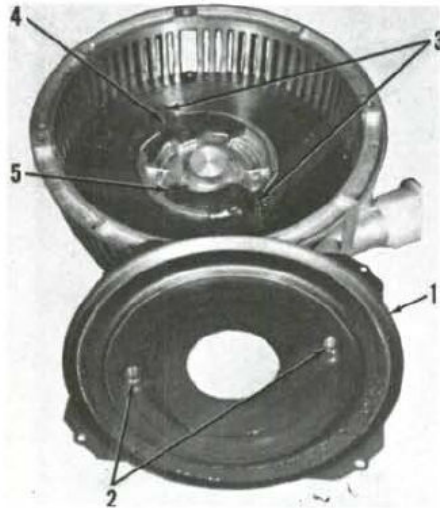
To disassemble the starter; remove the retaining screws and lift off cover plate (1). Engaging brake units consist of friction cups (2 & 4) and spring (3) which fit holes in pawls and may fall out when cover (1) is removed.
